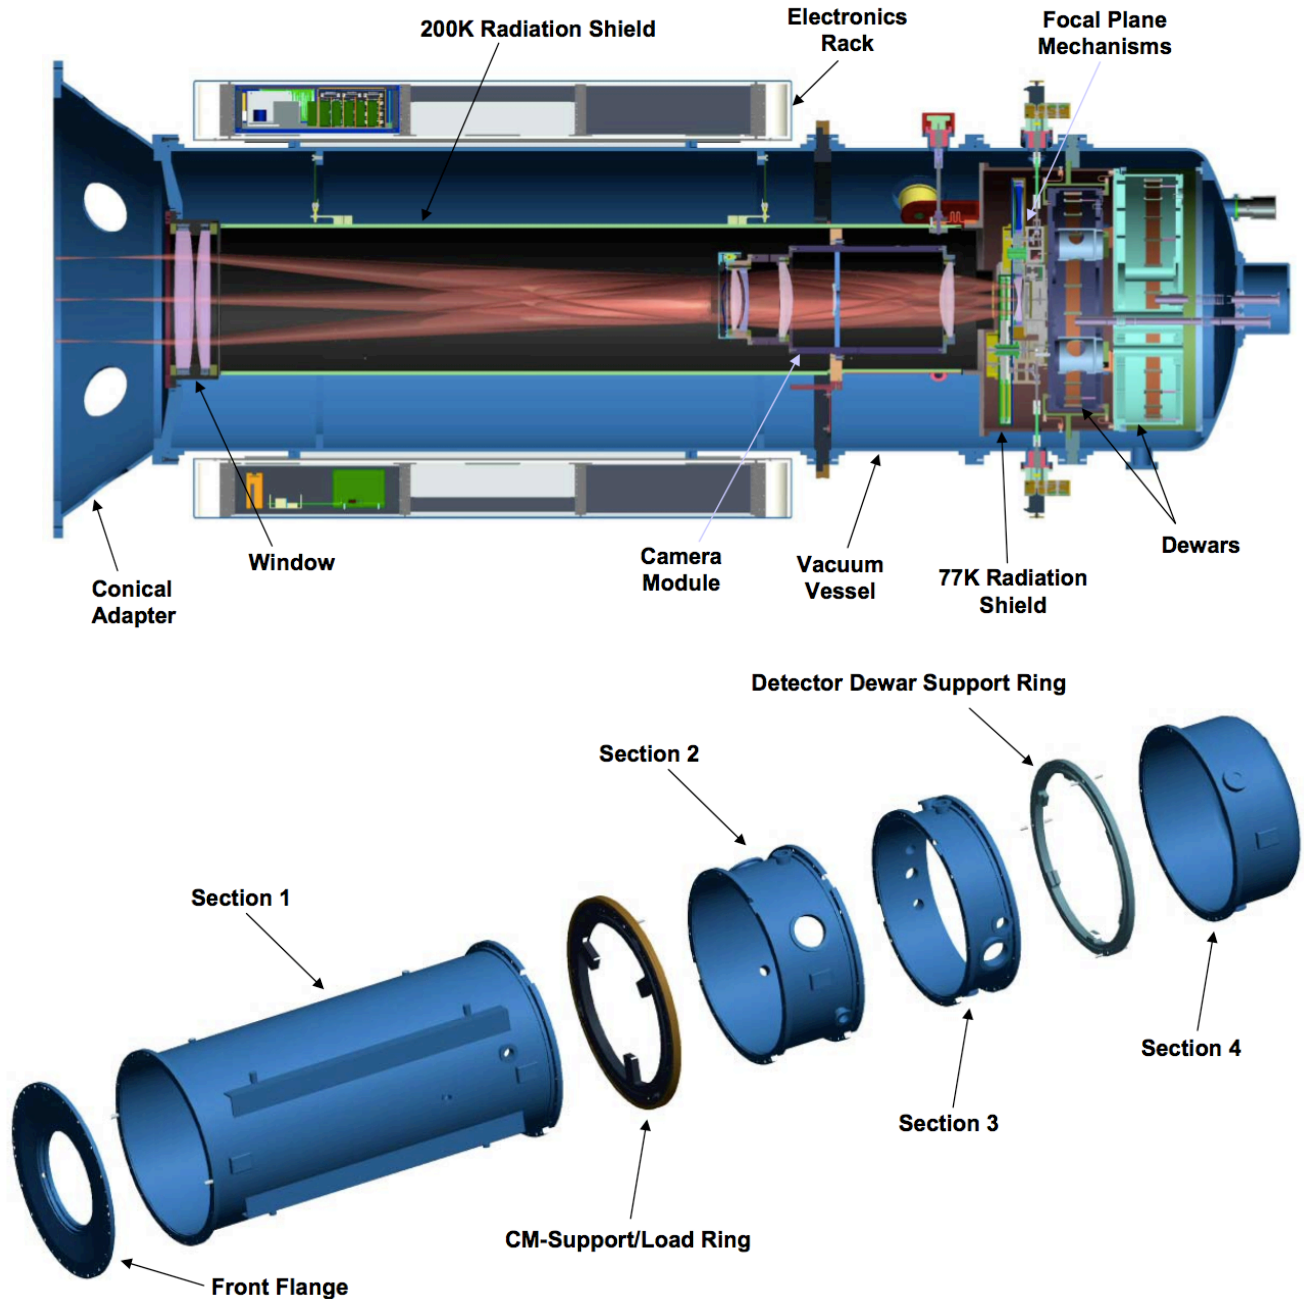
Top: A cross-section of the FourStar camera, bottom: An exploded view showing the sections of FourStar.
